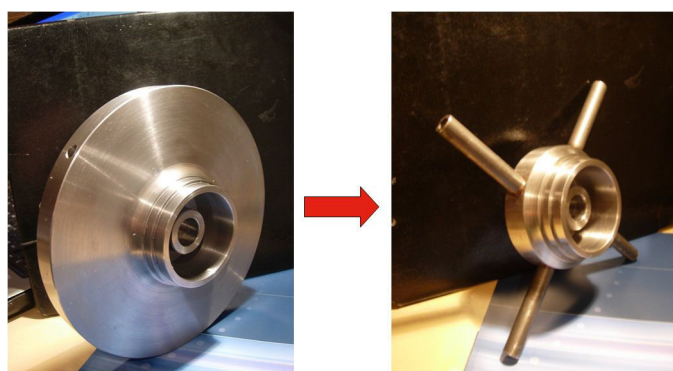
A drilled impeller pump and a multi-piped impeller pump.
